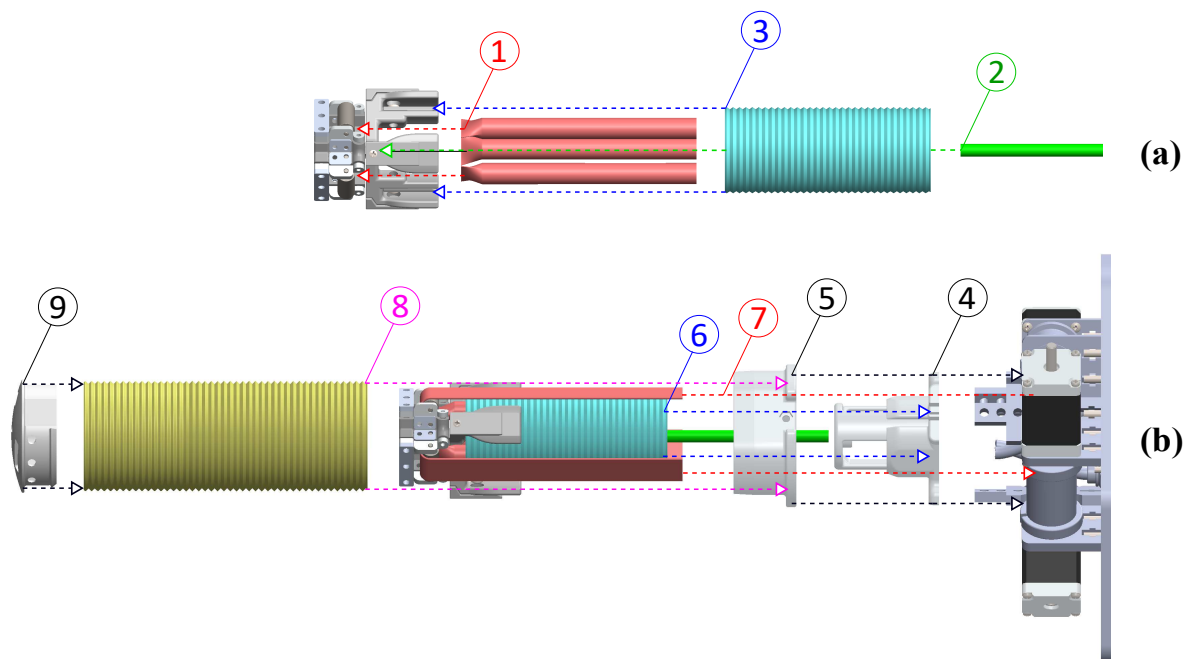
Assembly directions for (a) the inner sub-assembly and (b) for the final assembly of the robot body. Components are color coded as indicated: tubings (red), inner sheath (blue), outer sheath (yellow/purple), shaft (green), sheath reservoirs (white) and all other components are gray.
